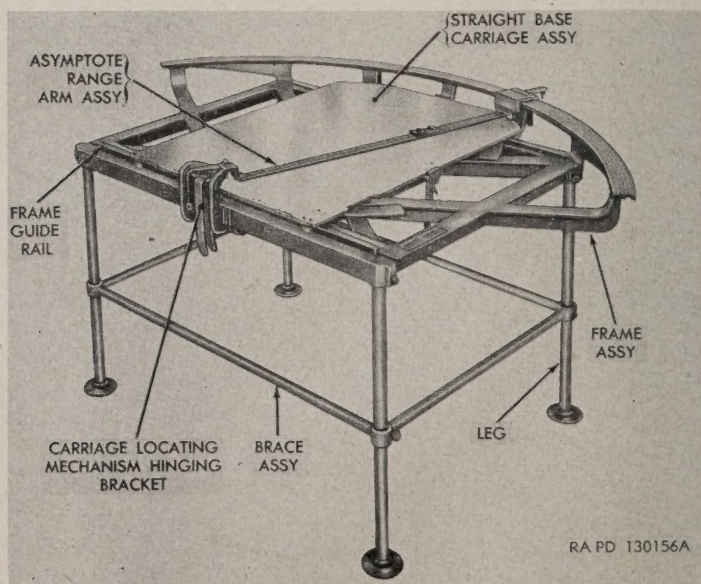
Sound-ranging plotting board M1 or M1A1—components.
